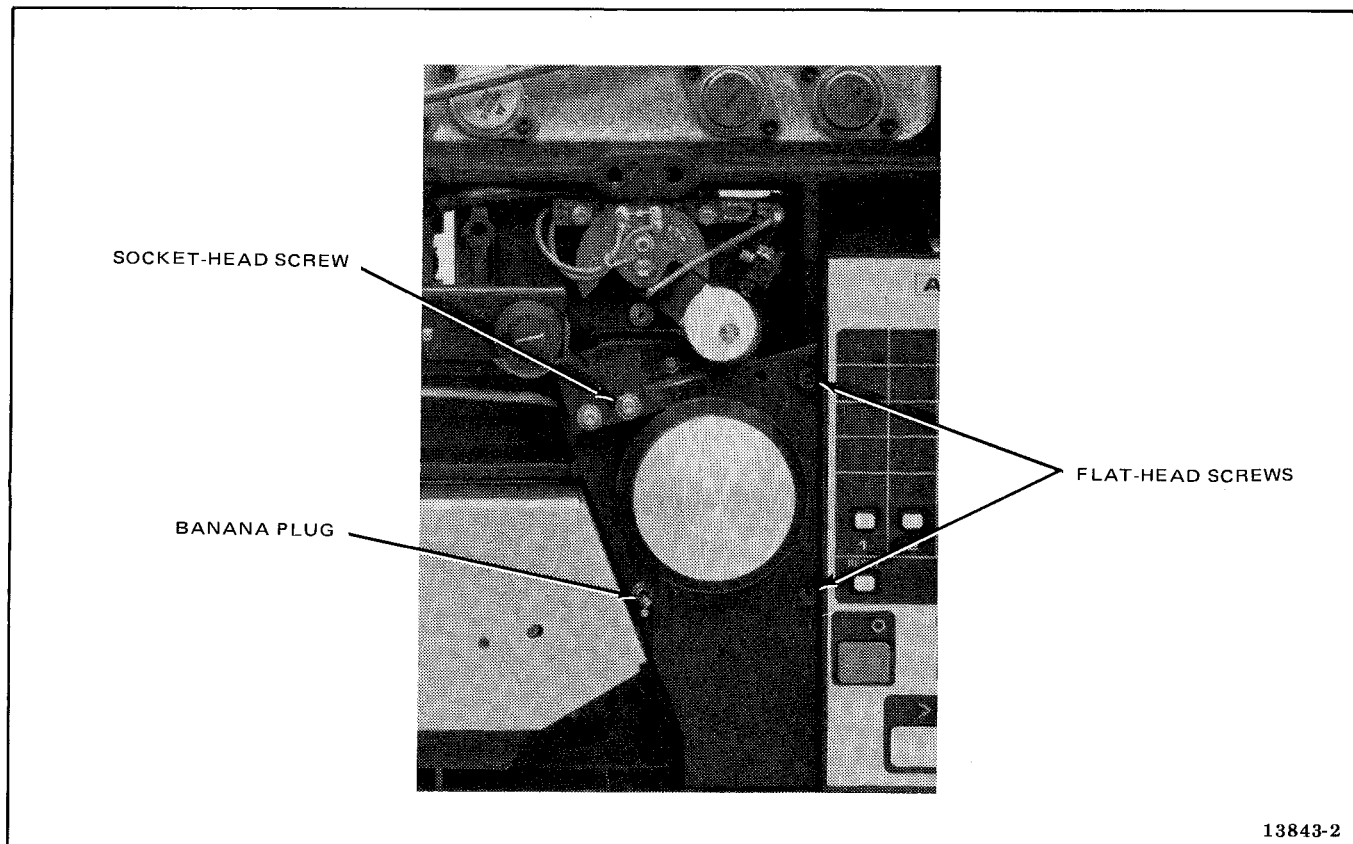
Front and Rear Tach, Cover Panel Removal
